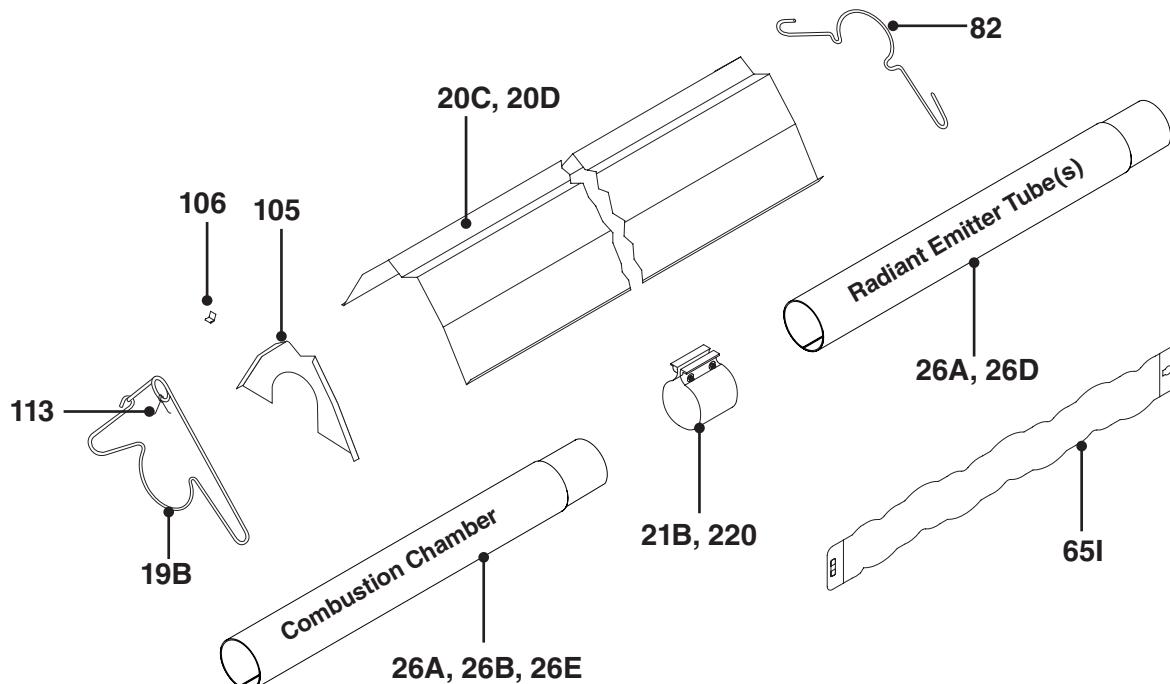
• Burner Assembly Components6.0 Parts • Heater Components and Parts ListChart 5.1 • Parts List
